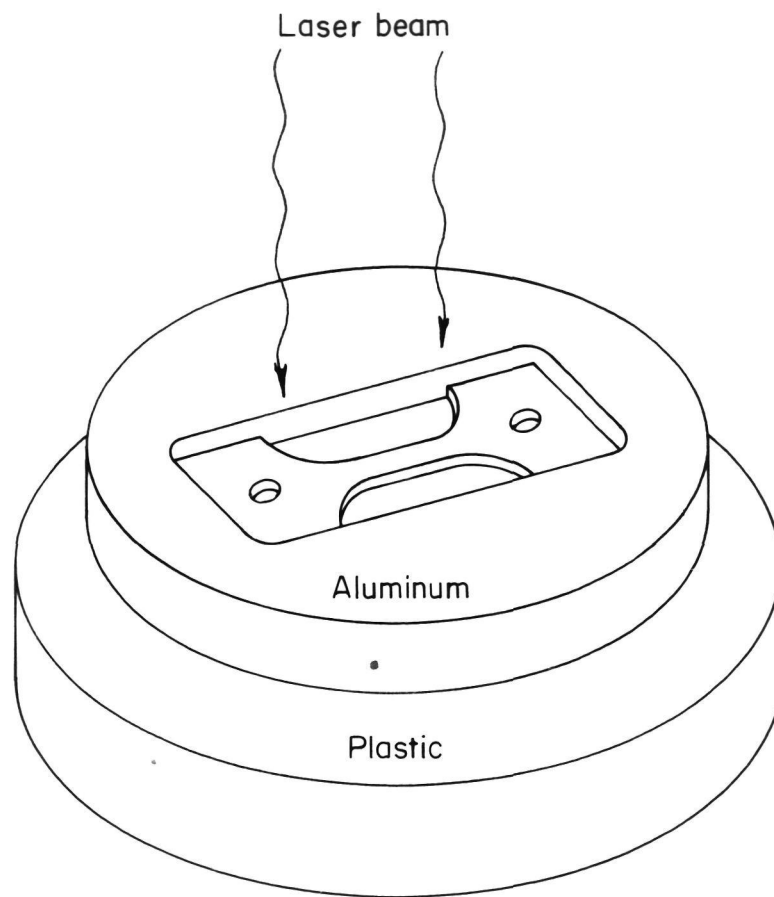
HOLDER FOR TENSILE SPECIMENS LASER SHOCKED
